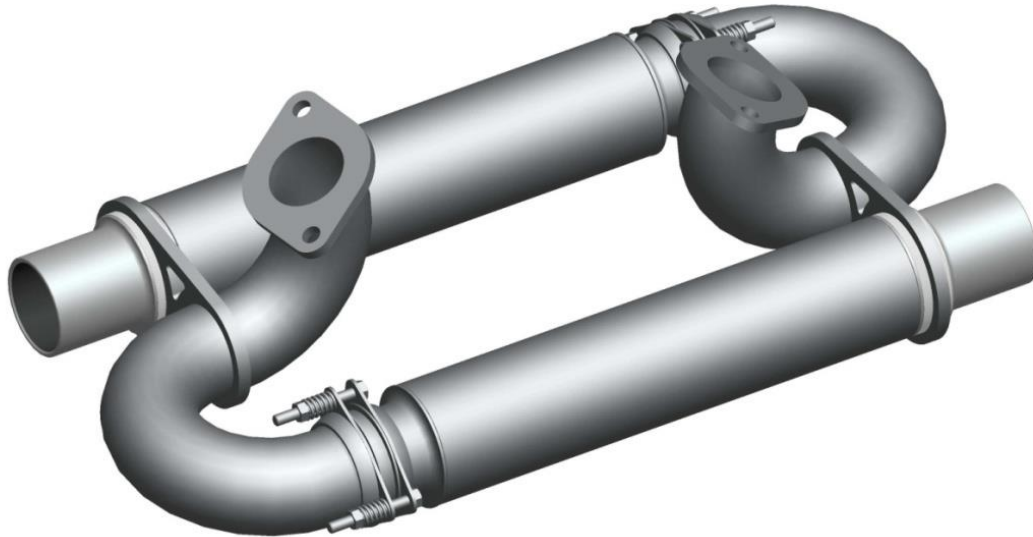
EXHAUST SYSTEM OF THE UAV ENGINE.
